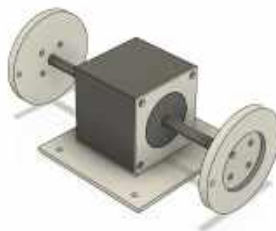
Stepper Motor Mounting and Flange Coupling to Crank Disks
